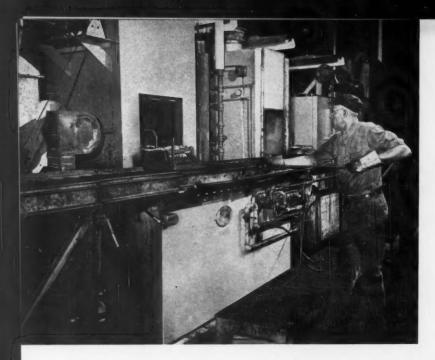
In this view is shown a tray of parts being pushed into the vestibule of one of the carburizing furnaces.
